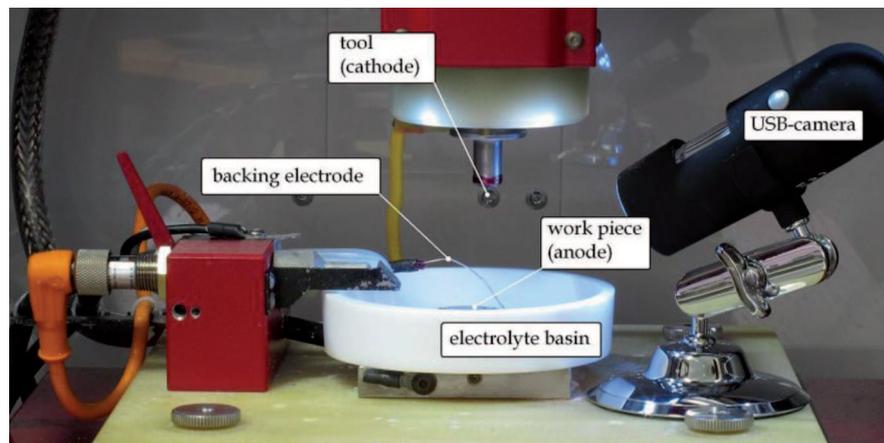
View inside the electrochemical machine with all important parts for the manufacturing process labelled
